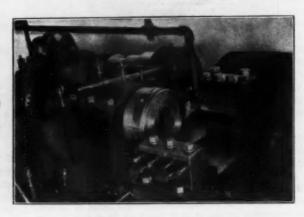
The Head Looking Toward the Collet and Showing the Forming Slide.
